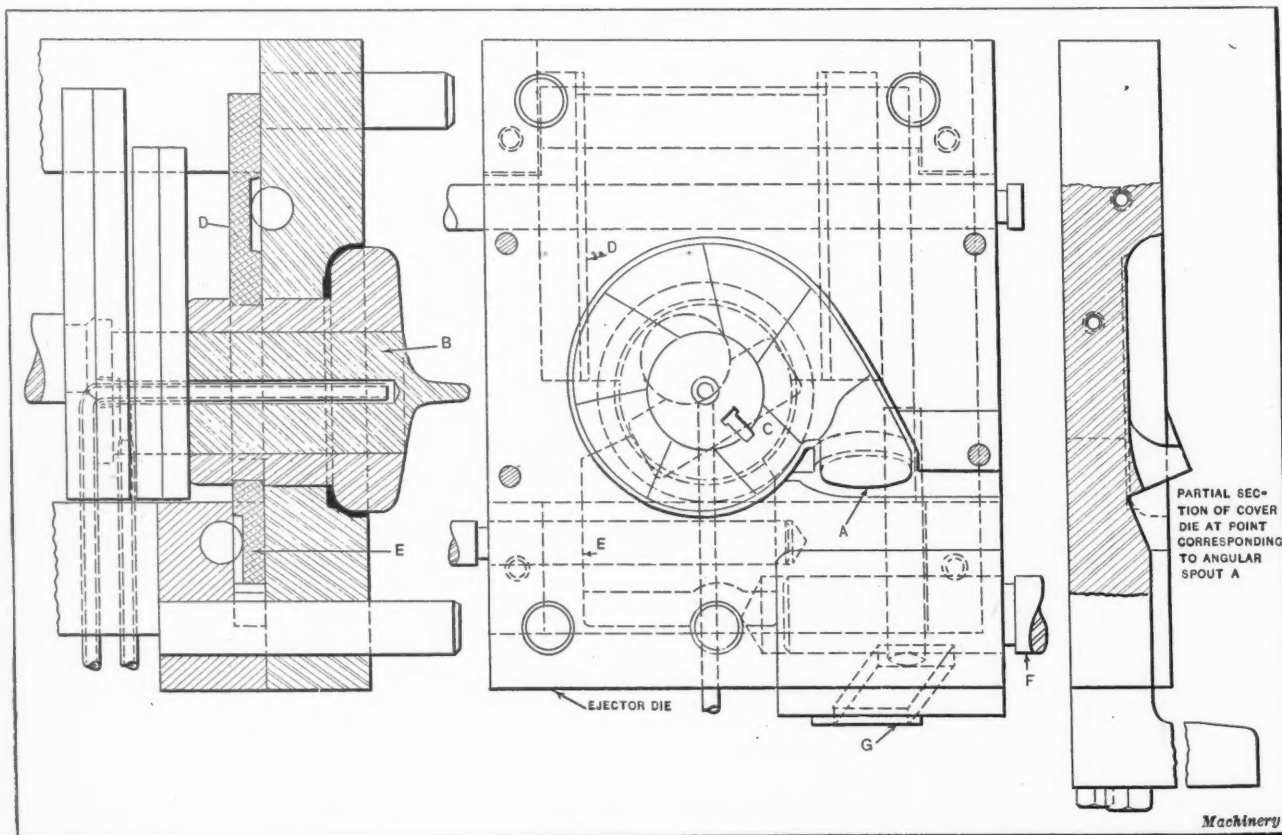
Plan and Sectional Views of Die for casting Aluminum Fan Case for a Vacuum Sweeper
